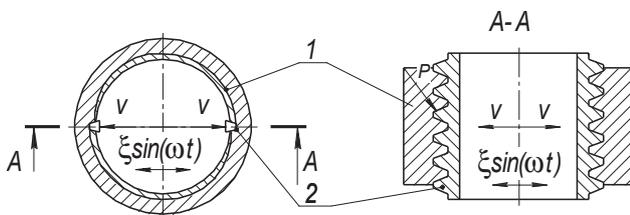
Schematic of extruding a thread with radial oscillations: 1 – nut; 2 – deforming elements
